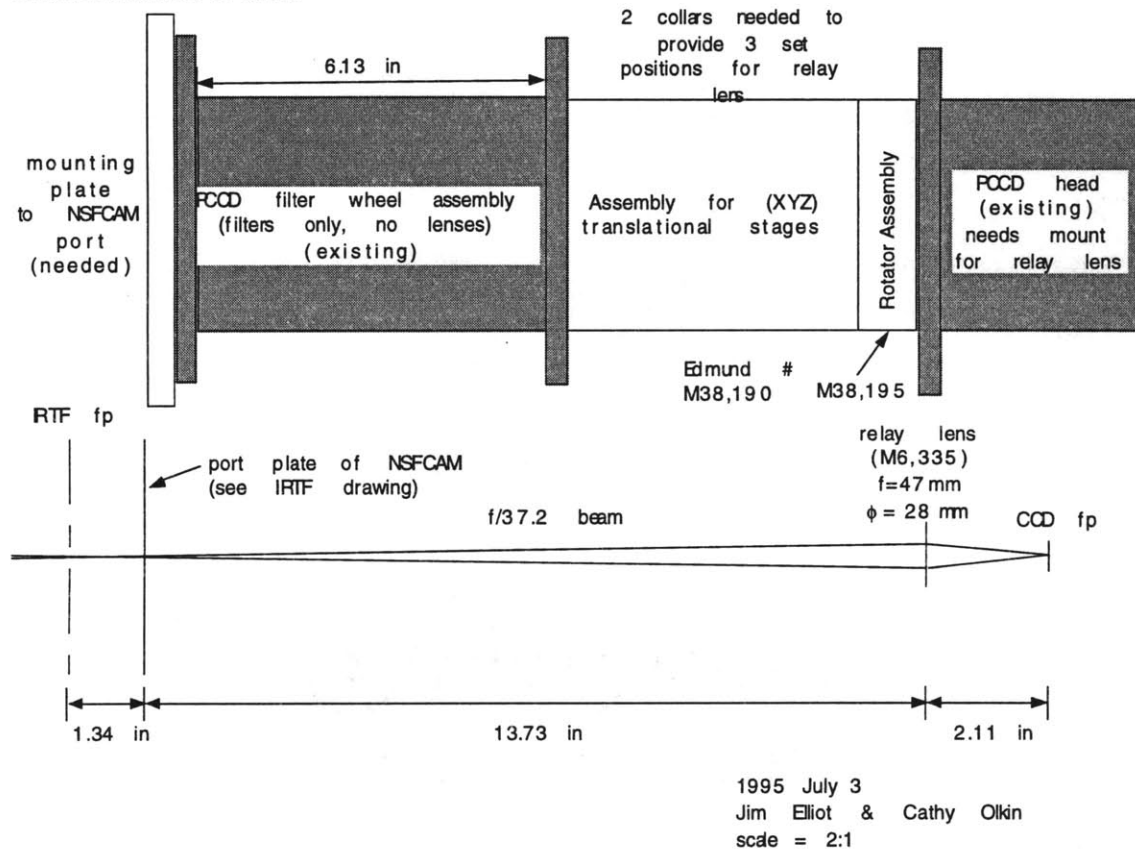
The optical and mechanical drawing of the PCCD mount on the optical port of NSFCAM. The mechanical diagram shows the mounting plate to the port on NSFCAM, the standard PCCD filter wheel, an assembly of 3 degree of freedom translational stages, a rotational stage and the camera head. The Edmund's part numbers are indicated for the translational stage, rotational stage and relay lens. The optical diagram shows the f/37.2 beam passing through the focal plane inside the dewar, exiting the dewar 1.34 inches after the focal plane. The f/# of the beam is reduced by a factor of 7.14 at the relay lens, where the field outside 51 arcsec is vignetted by the lens. The demagnified field reaches the detector at the focal plane. Original drawing scale was 2:1; this reproduction was reduced to 60%.
